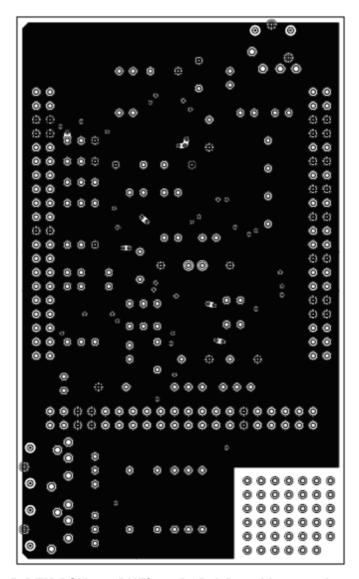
DEM-PCM1870RHF/1774RGP-A Board Layout—Inner Layer 2
